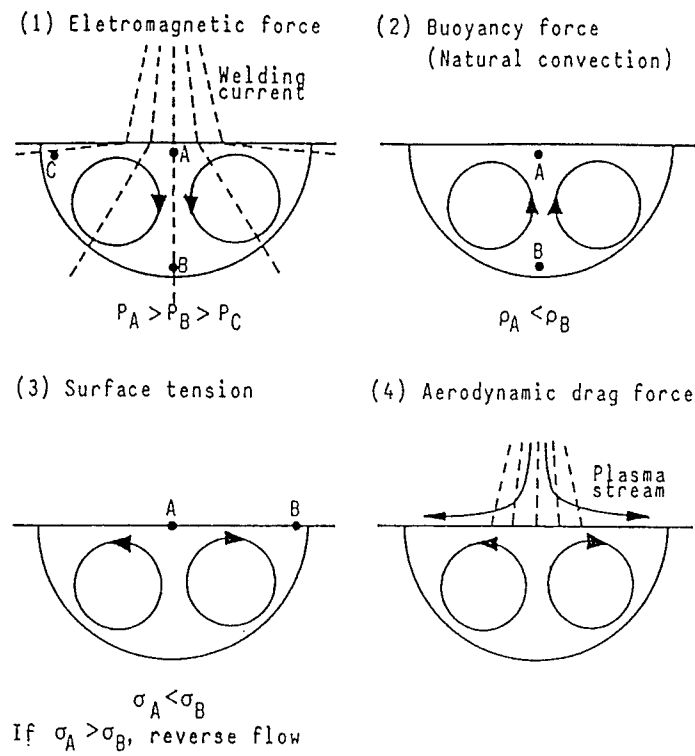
Four flow-inducing forces and the resultant flow type inside a weld pool [6].
